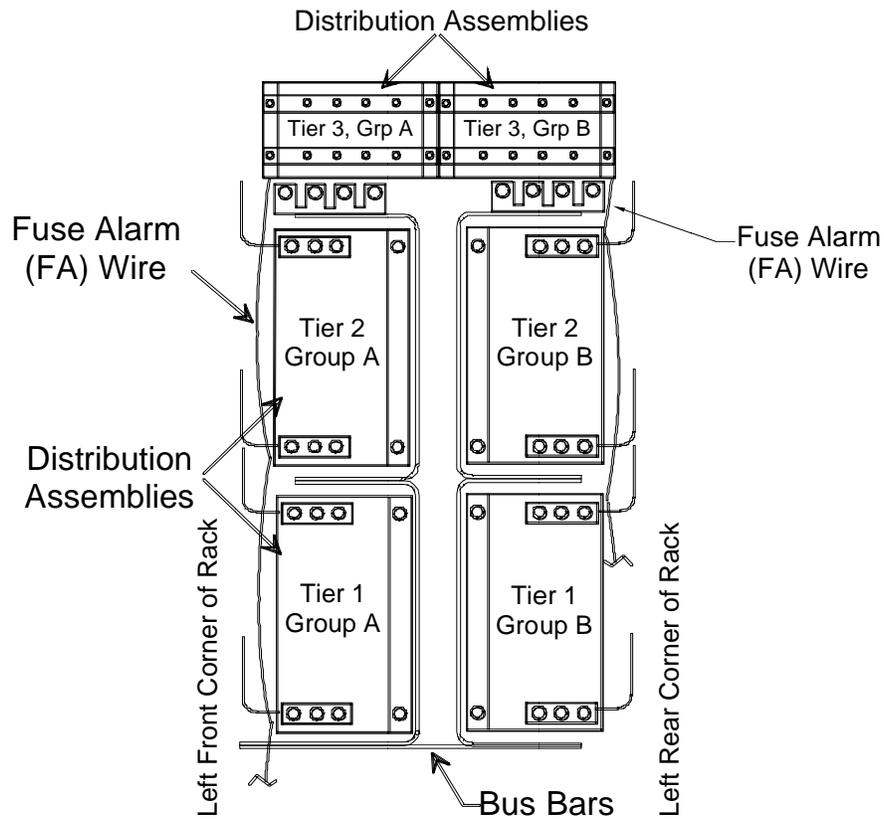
DISTRIBUTION ASSEMBLIES, GJ1
